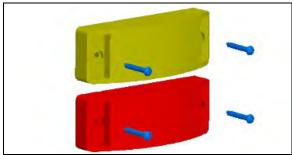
SIDE MARKER AND SIDE DIRECTIONAL LIGHTS
